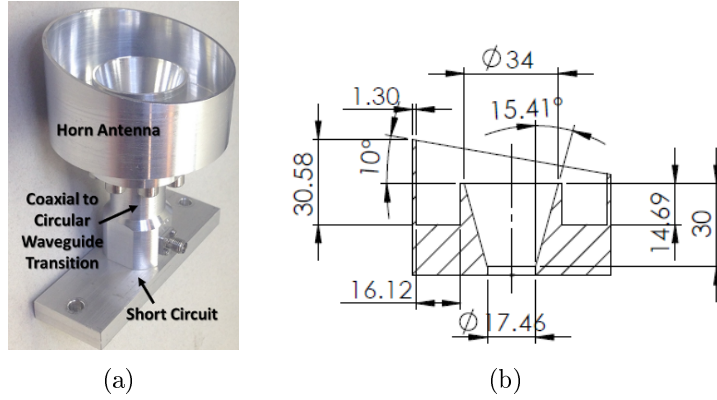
The proposed tapered coaxial cavity horn antenna design layout and details. (a) Fabricated model. (b) A section view to the design details along the cavity tapering with all dimensions in millimeter.
